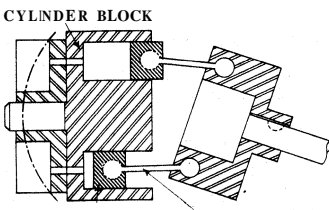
HYDRAULIC AXIAL-PISTON PUMP OR MOTOR
